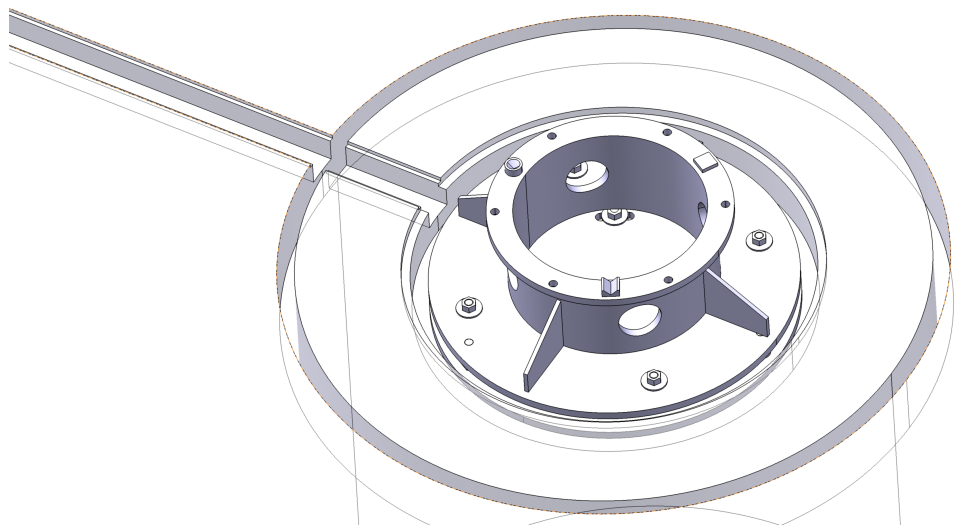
This is the telescope lower pier. Underneath it has the three counterparts to the acceptor plate kinematic mounts. The pier is lowered onto the plate using the guide pins and settled onto the kinematic points. Once in place the four threaded guide pins can be used to lock the lower pier using washers and four nuts. These are not tightened but left with only light contact to protect the telescope from tipping in the event of misfortune, for instance a seismic event.
